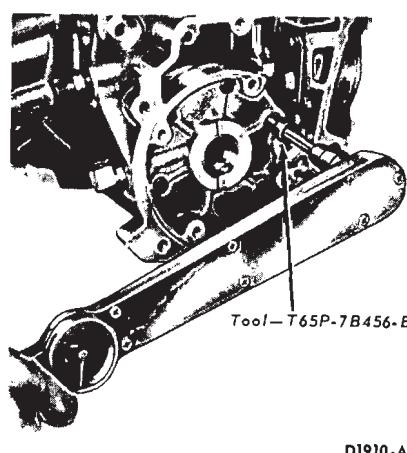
Installing One-Way Clutch Outer Race Attaching Bolts
